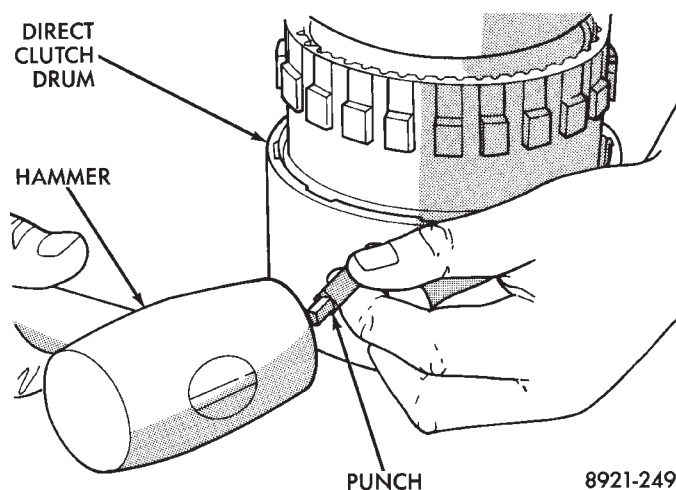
Marking Direct Clutch Drum And Annulus Gear For Assembly Alignment
